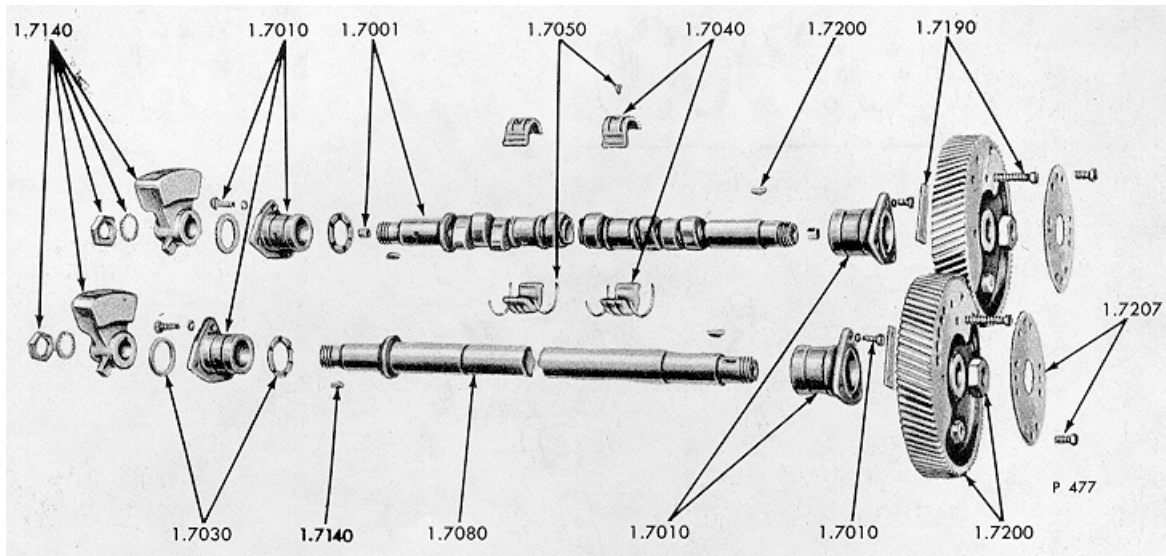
A. CAMSHAFT AND GEAR TRAIN
